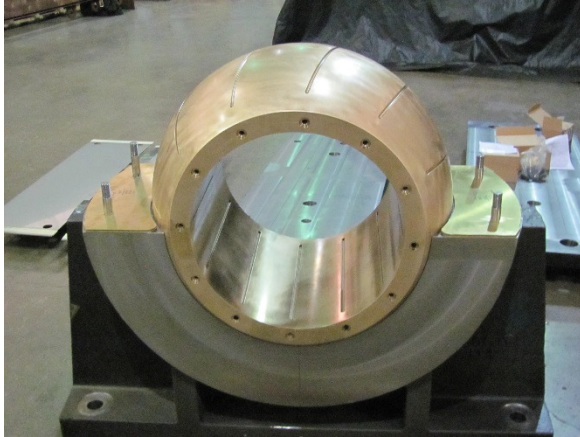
Spherical Trunnion Bearing with bearing cap removed. Grease grooves are visible inside and outside of the bushing.
